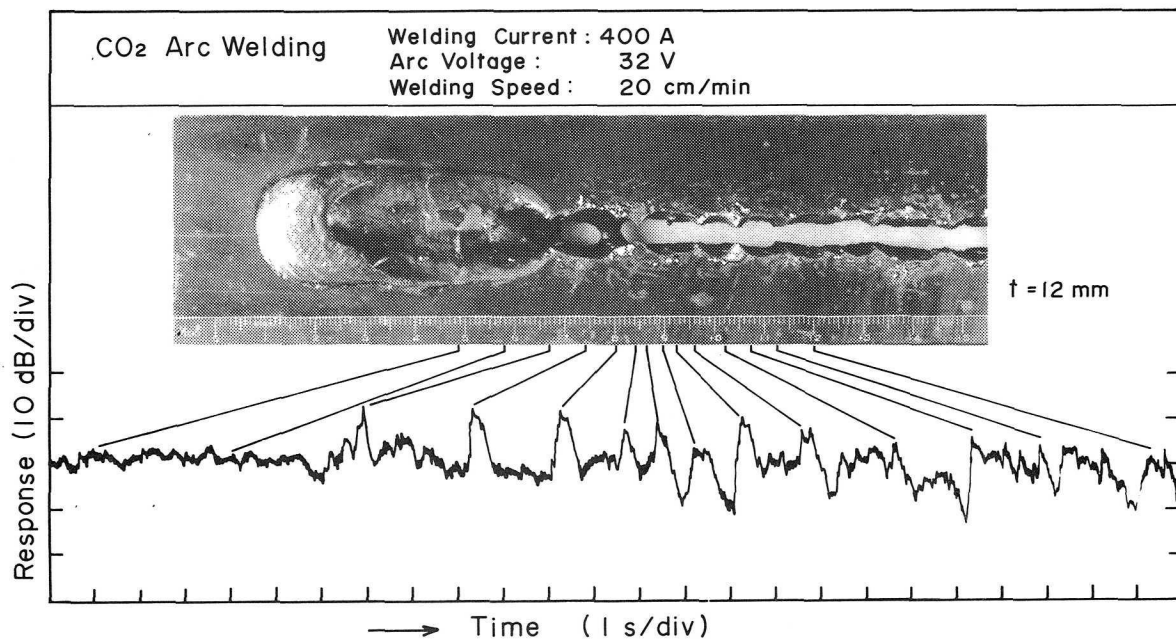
Example of burn-through detected by arc sound in CO₂ arc welding.
